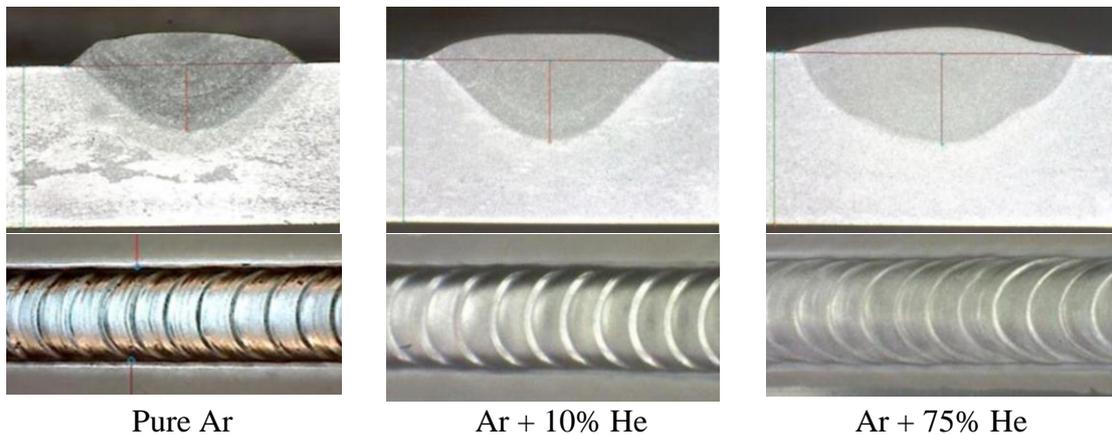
TIG (AC) welding of 6 mm thick aluminium with 4043 filler (Miller, n.d.).
